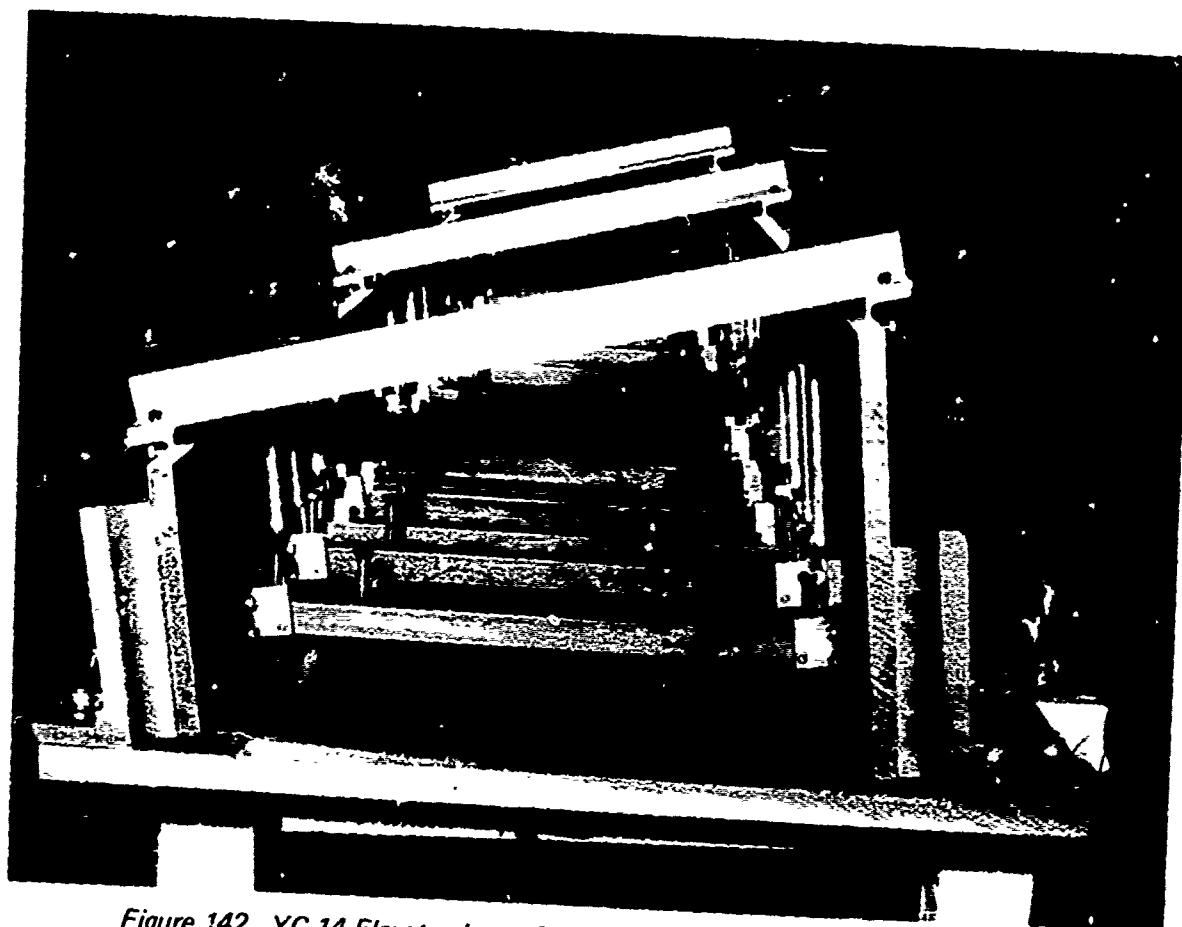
YC-14 Elevator Large Section Assembly Fixture – Side View
